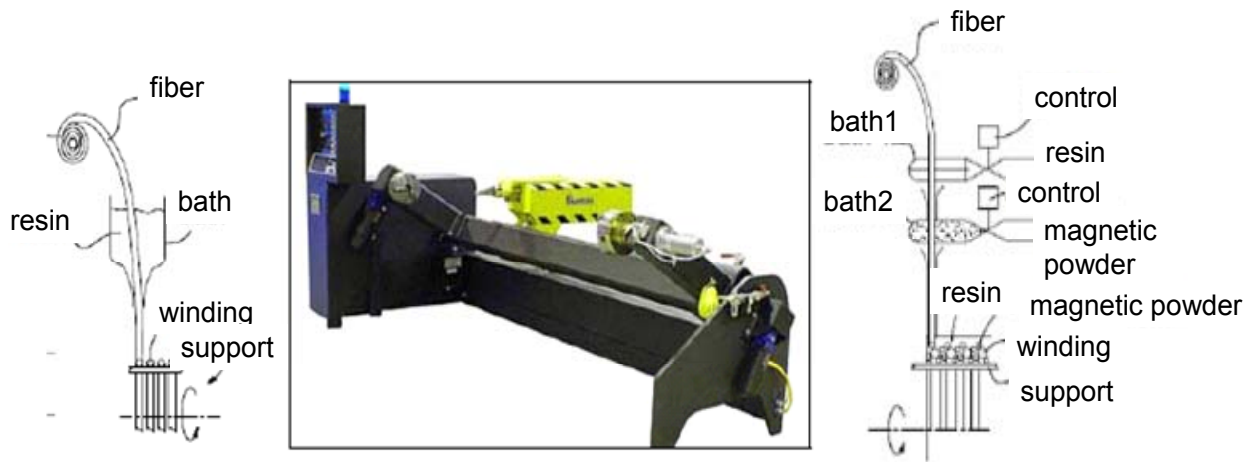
Multiple axis winding machine, left: Fiber wetting with one bath, right: controlled alternative fiber wetting with two paths [12]
